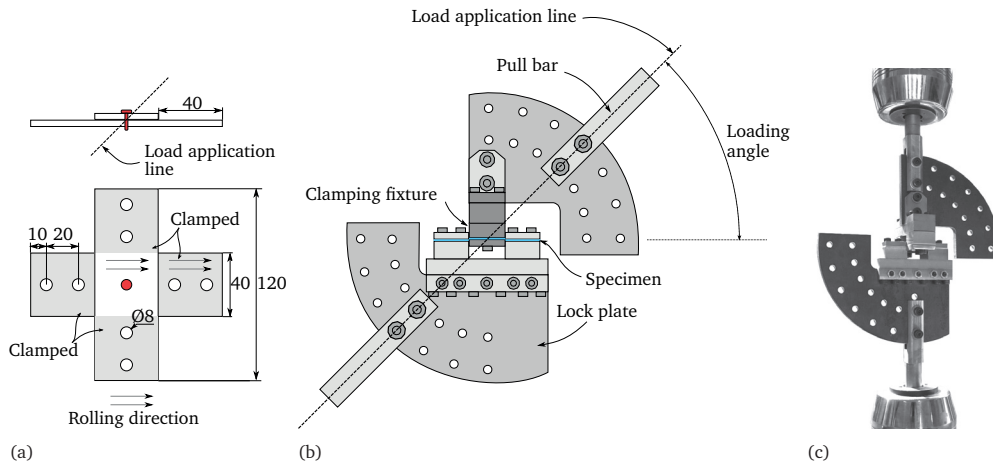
Cross test set-up. (a) Geometry of specimen. (b) Schematic illustration of testing rig. (c) Picture of testing rig.
